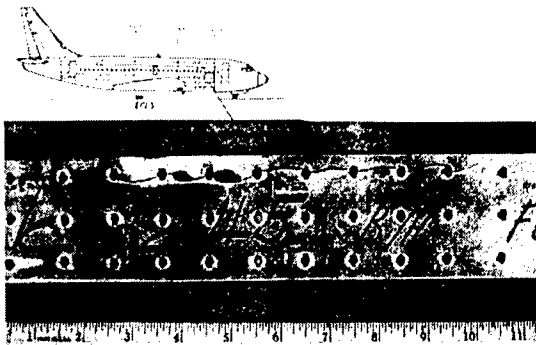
MSD cracks which have linked to form a long lead crack. (courtesy T.Swift, FAA)
